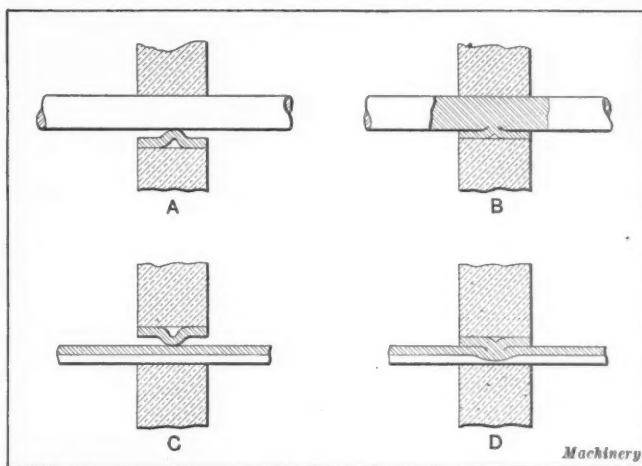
Diagram illustrating Process known as "Ridge-welding"
